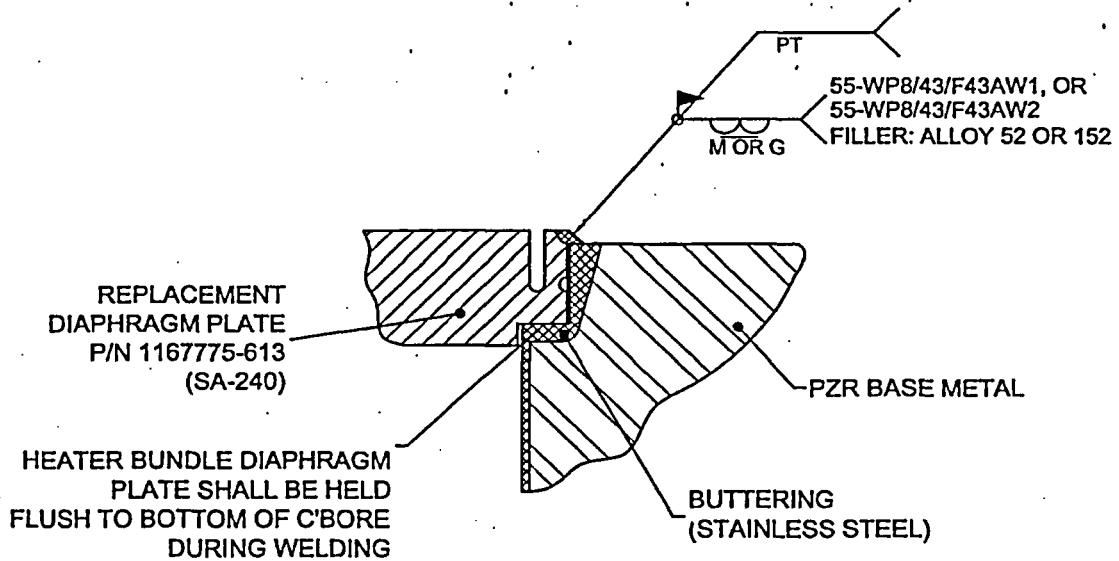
Detail of the stainless steel diaphragm plate to stainless steel cladding seal weld for the replacement lower heater bundle in 2003. The weld metal is Alloy 52/152.
